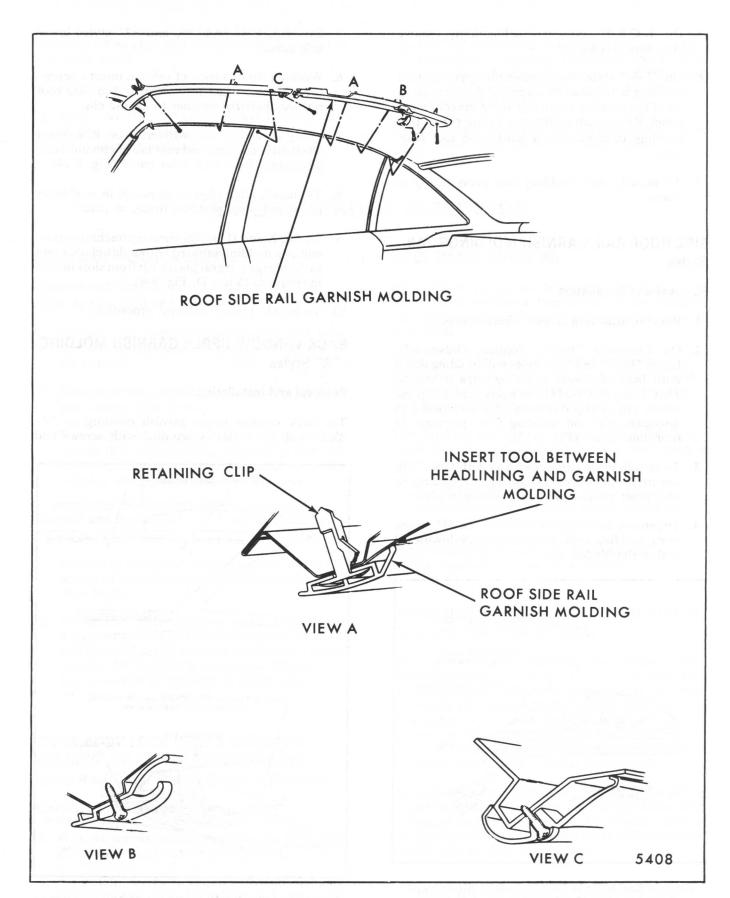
Roof Side Rail Garnish Molding Attachment - "A and B-35,45,69" Styles
